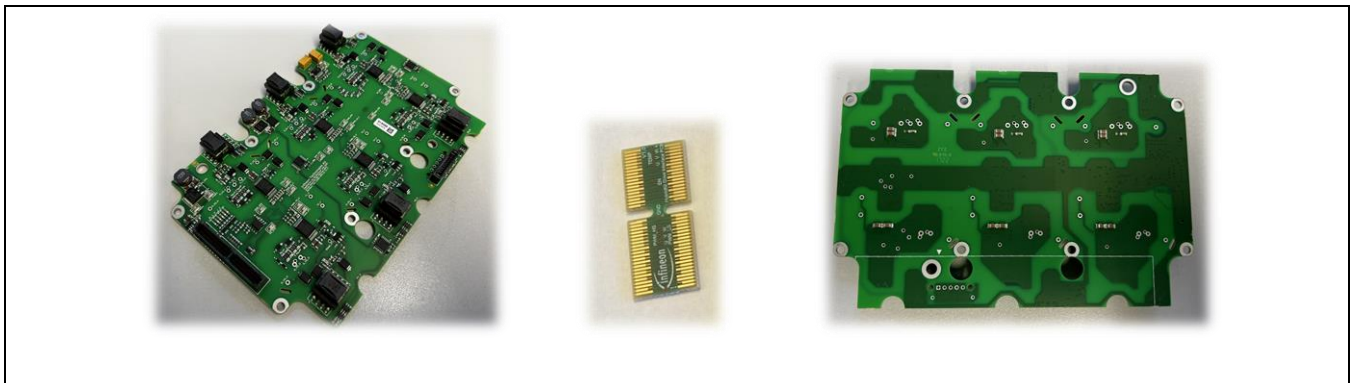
Typical appearance of the gate driver evaluation board HPD GD BOARD G1 SiC (SP005592047) from the side, top, and bottom view.
